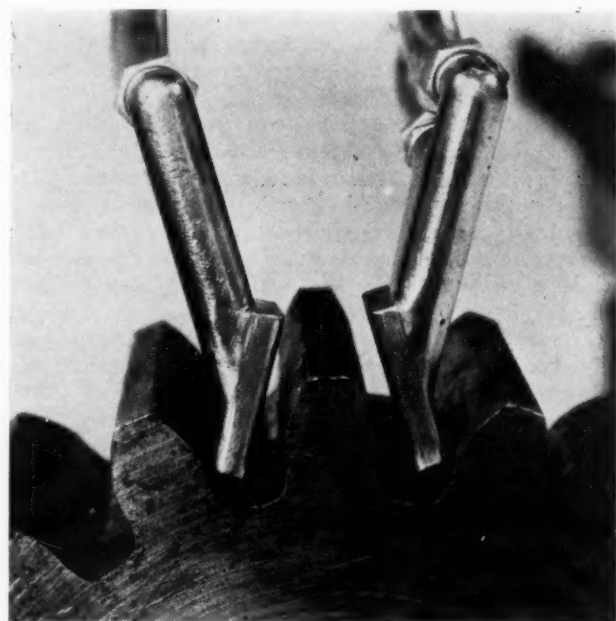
SHOWING THE CORRECT POSITIONING OF GEAR-HARDENING HEADS WITH RESPECT TO THE GEAR TOOTH
